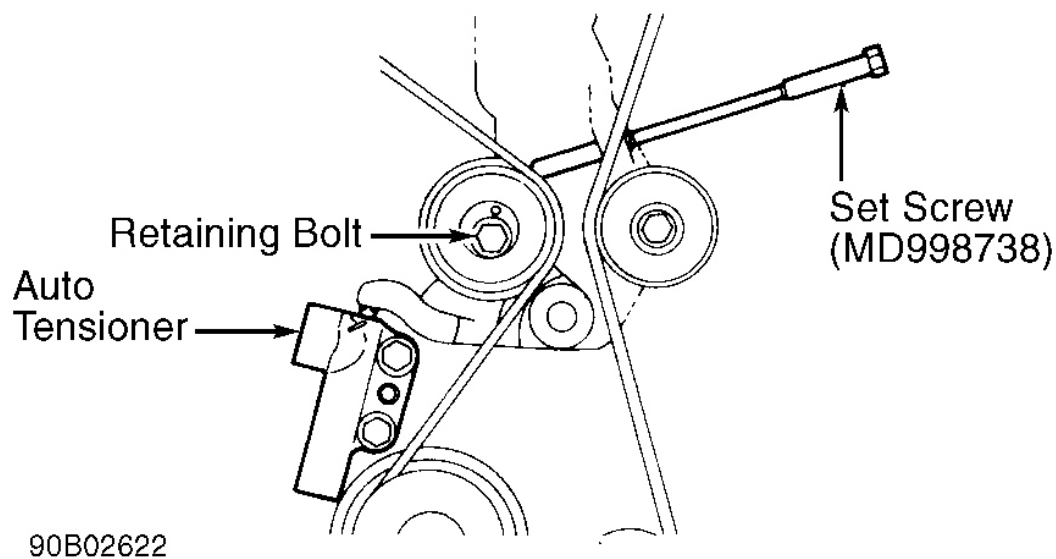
Installing Set Screw To Retract Auto Tensioner Rod
